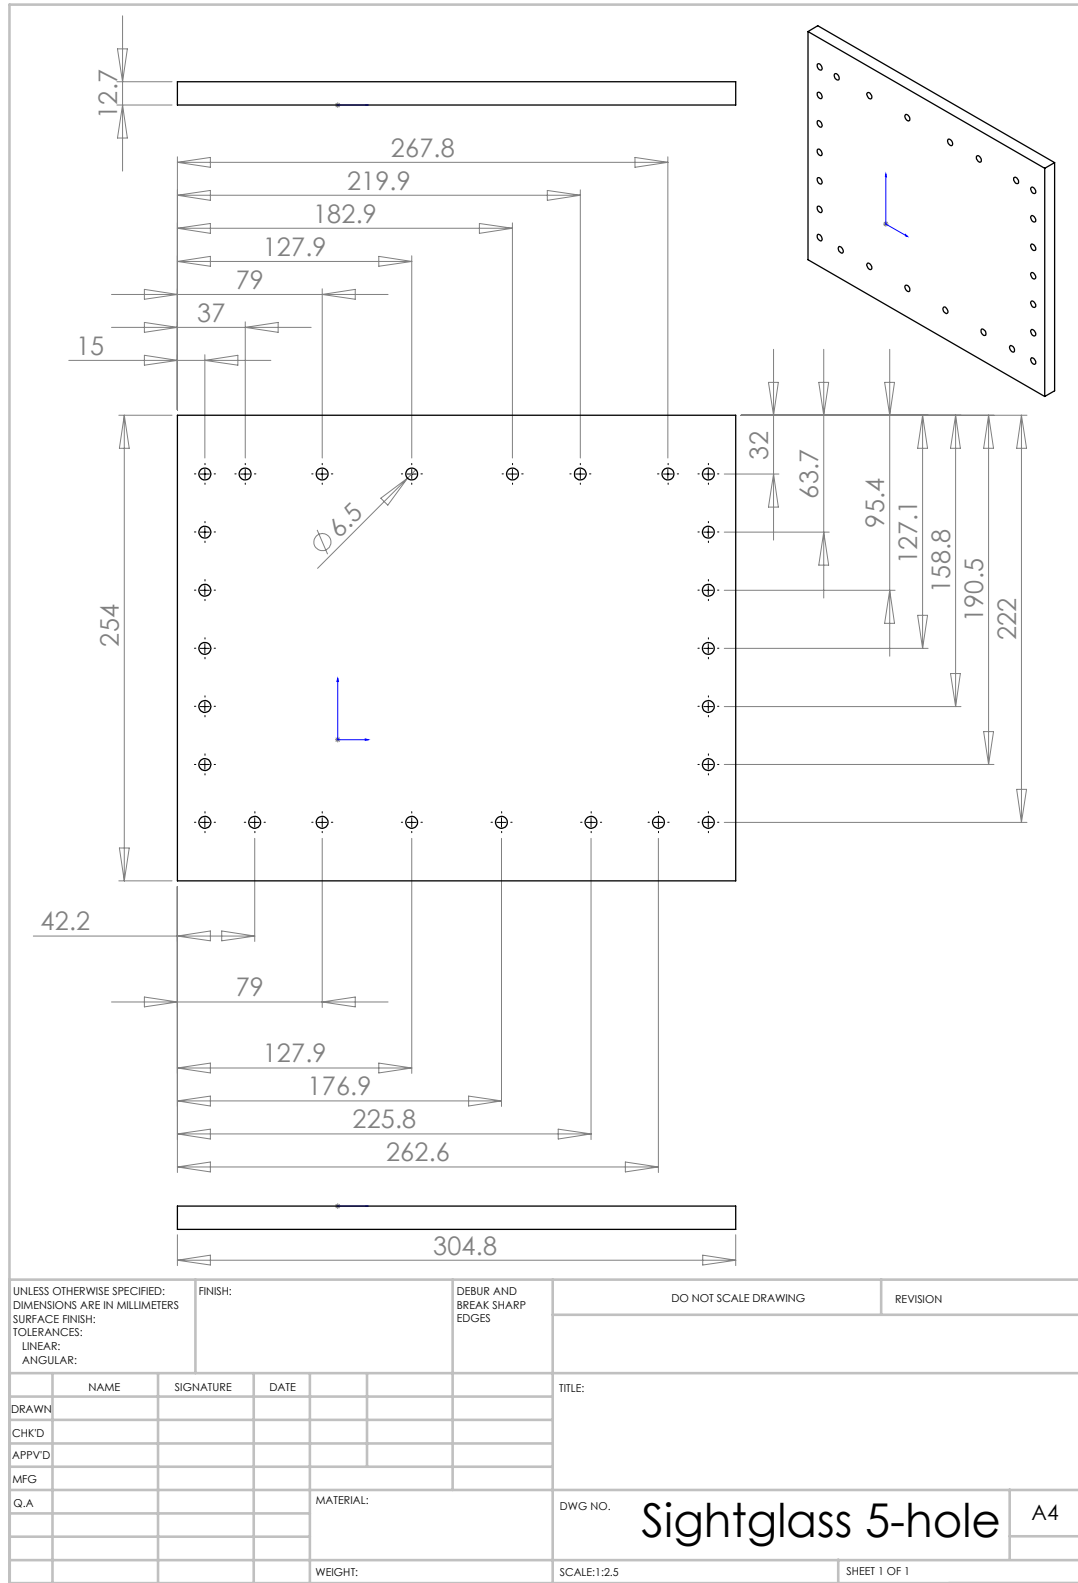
Mark I polypropylene base technical drawing page 4.
